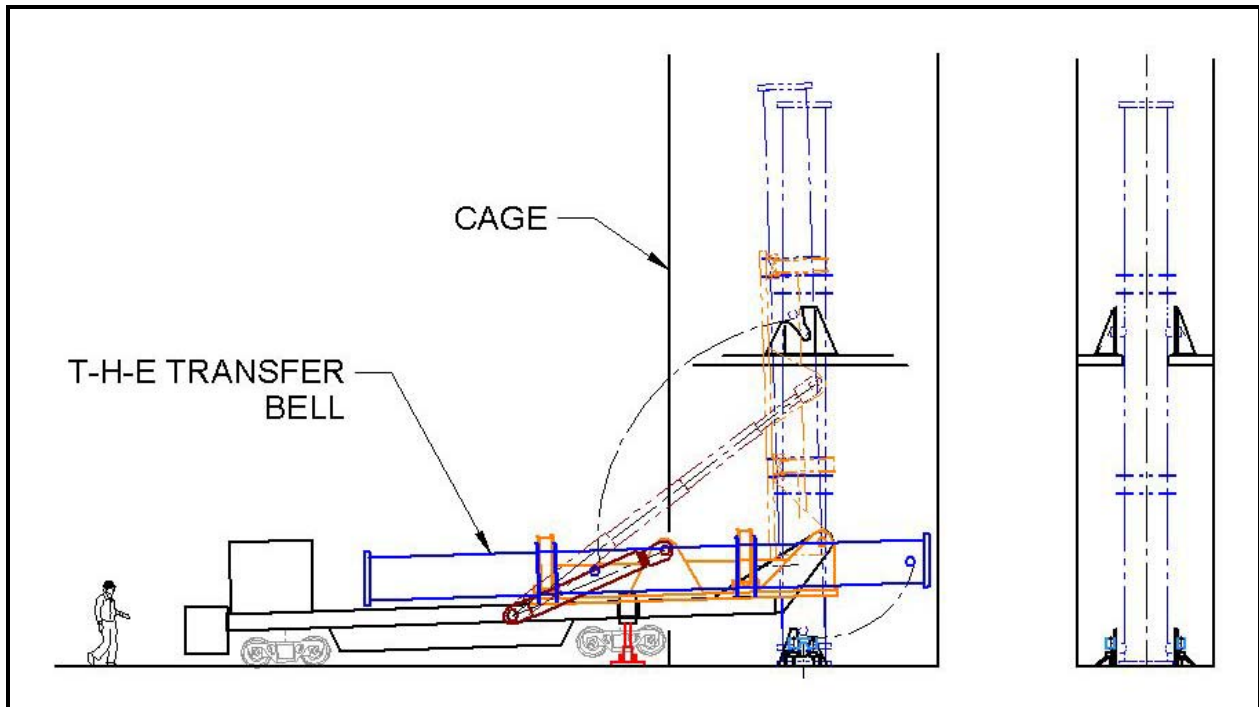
Overhead and Side Views of the T-H-E Handler
